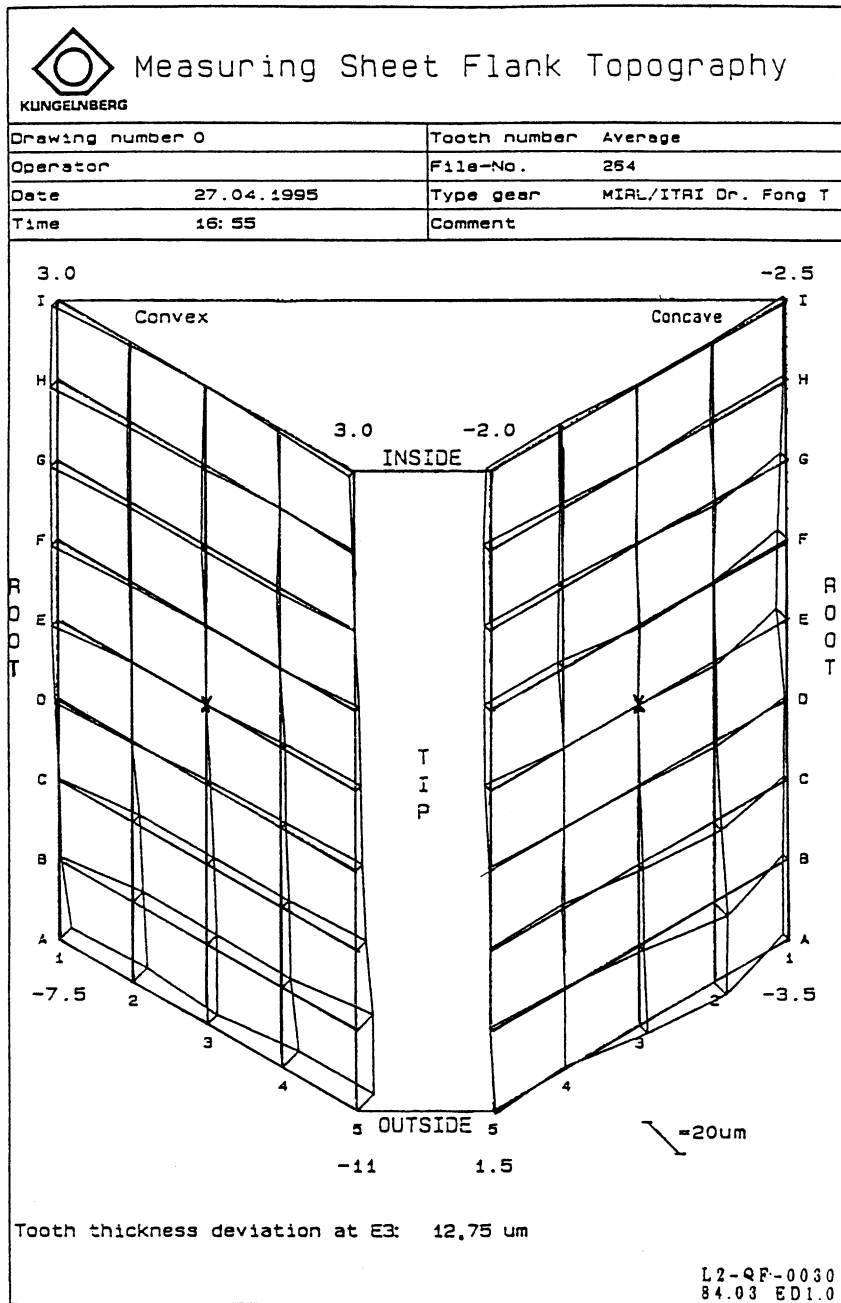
Surface deviations of a pinion cut using corrective machine-tool settings.
